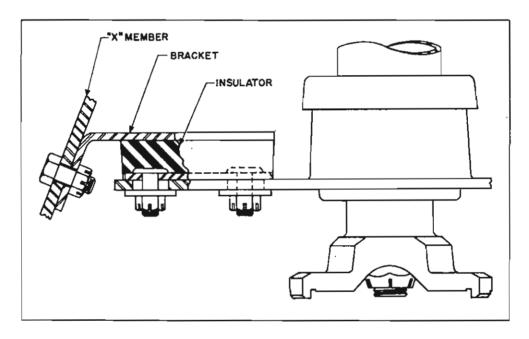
Intermediate Bearing and Bracket Assembly Used in 21st Series Long Wheelbase Models.
